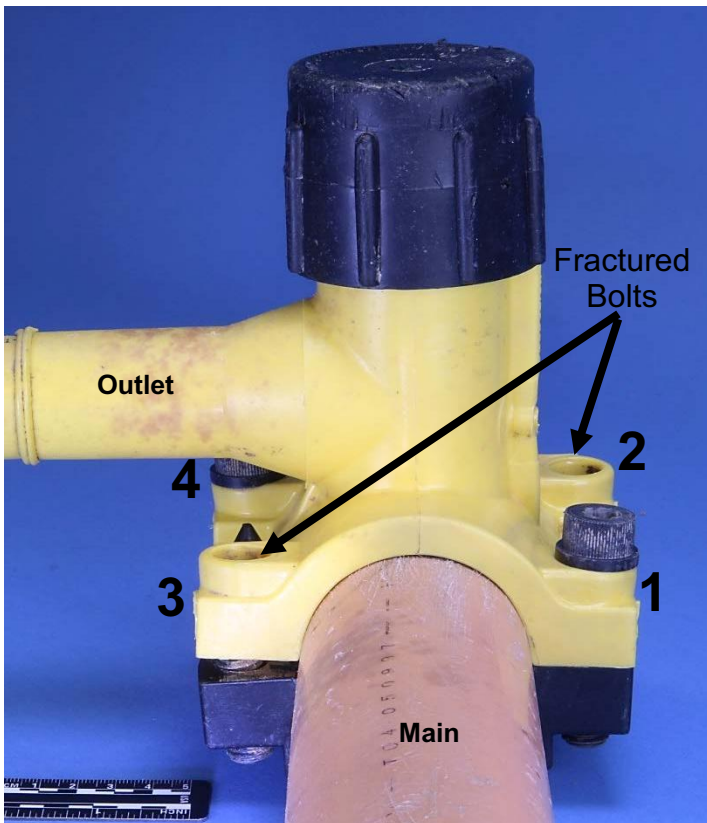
Side view of the tee assembly showing fractured bolts "2" and "3".
